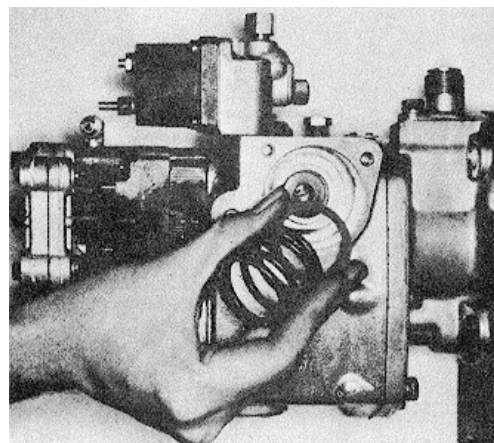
, F5303. Removing AFC bellows spring and washer
